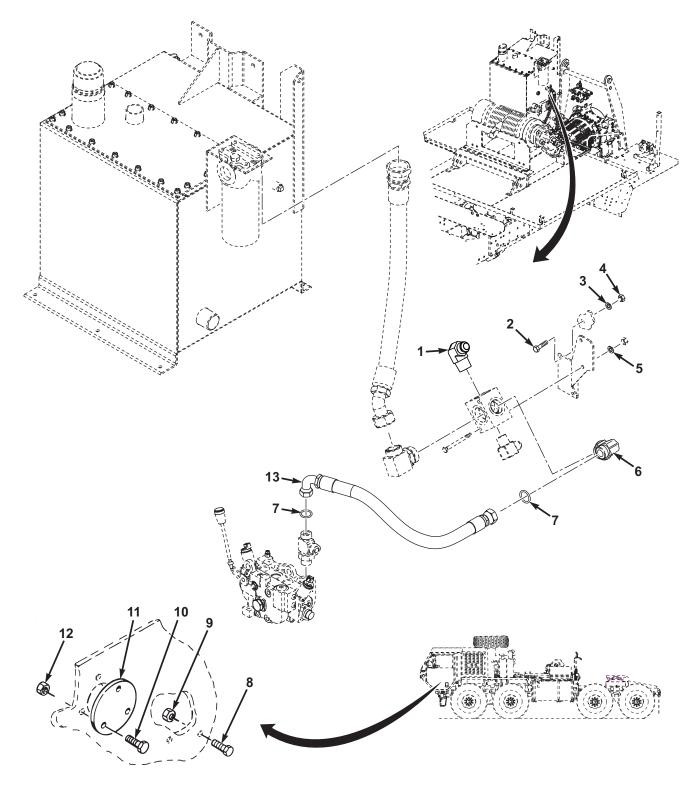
MAIN HYDRAULICS (Sheet 1 of 4)
